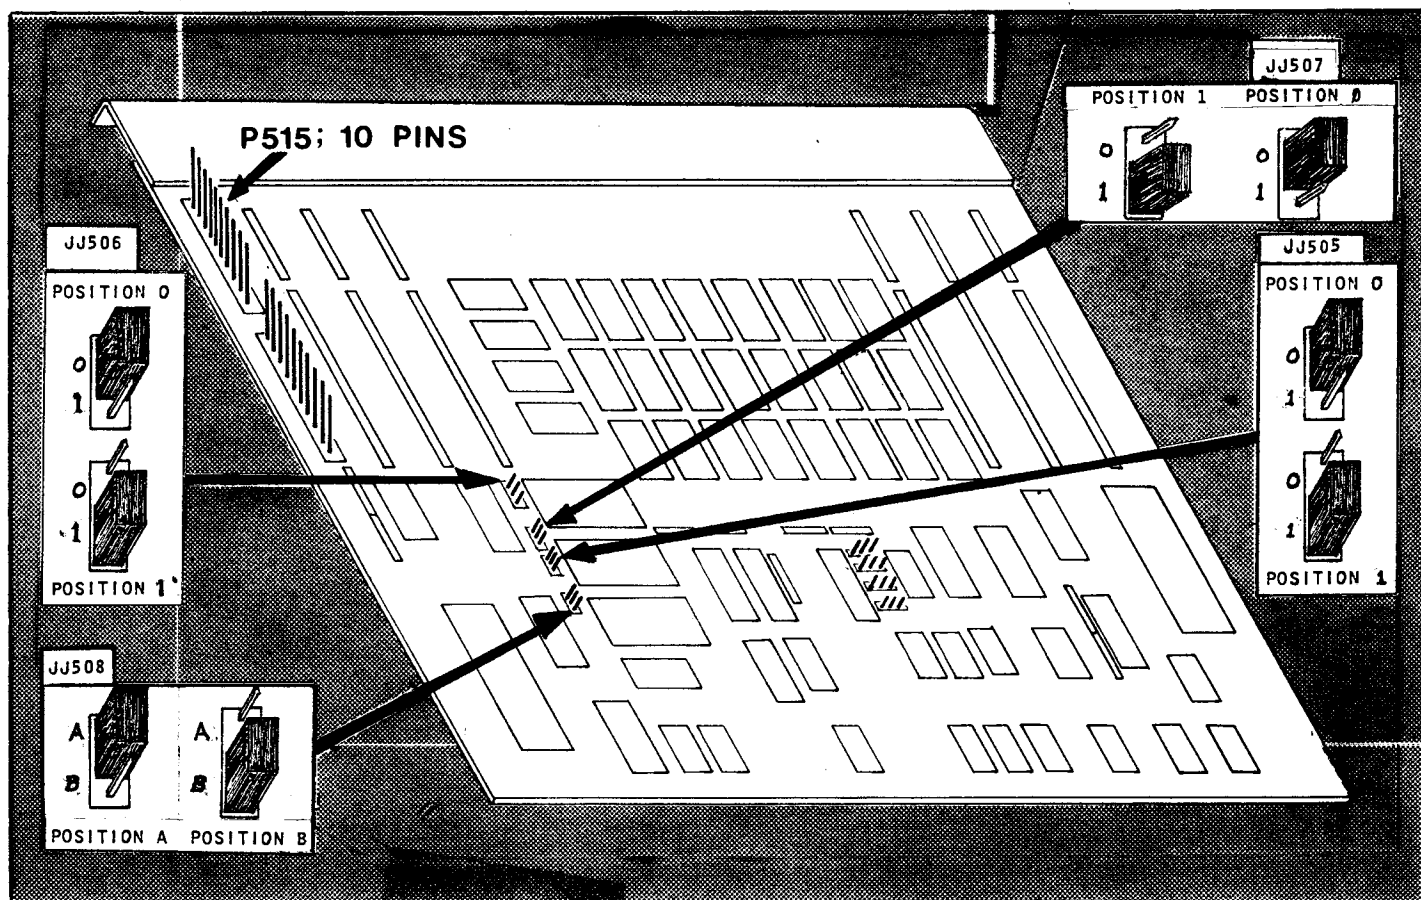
OLDER H/Z89 JUMPER LOCATIONS
